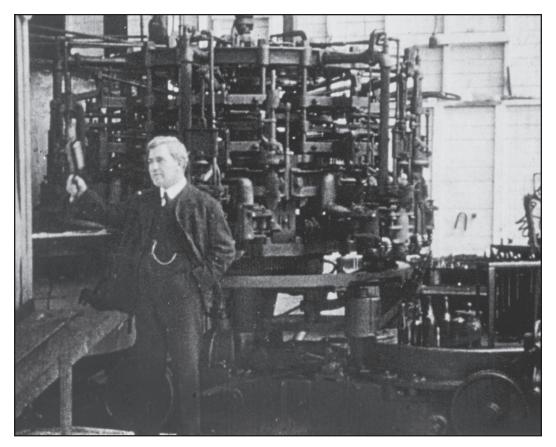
Photograph of Michael Owens holding a bottle taken hot off an Owens bottle-blowing machine (Floyd, Bowers, and Brownlee 2006). (Photo courtesy of the Owens-Illinois, Inc. Archives, MSS-200 in the Ward M. Canaday Center for Special Collections, University of Toledo.)
